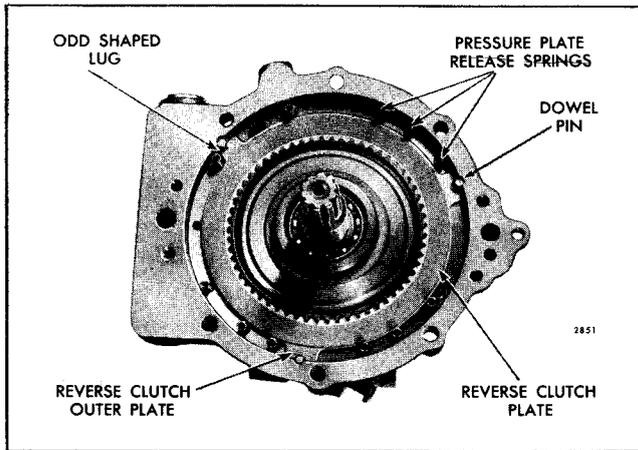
Location of Reverse Clutch Release Springs, Clutch Plates and Dowel Pins
